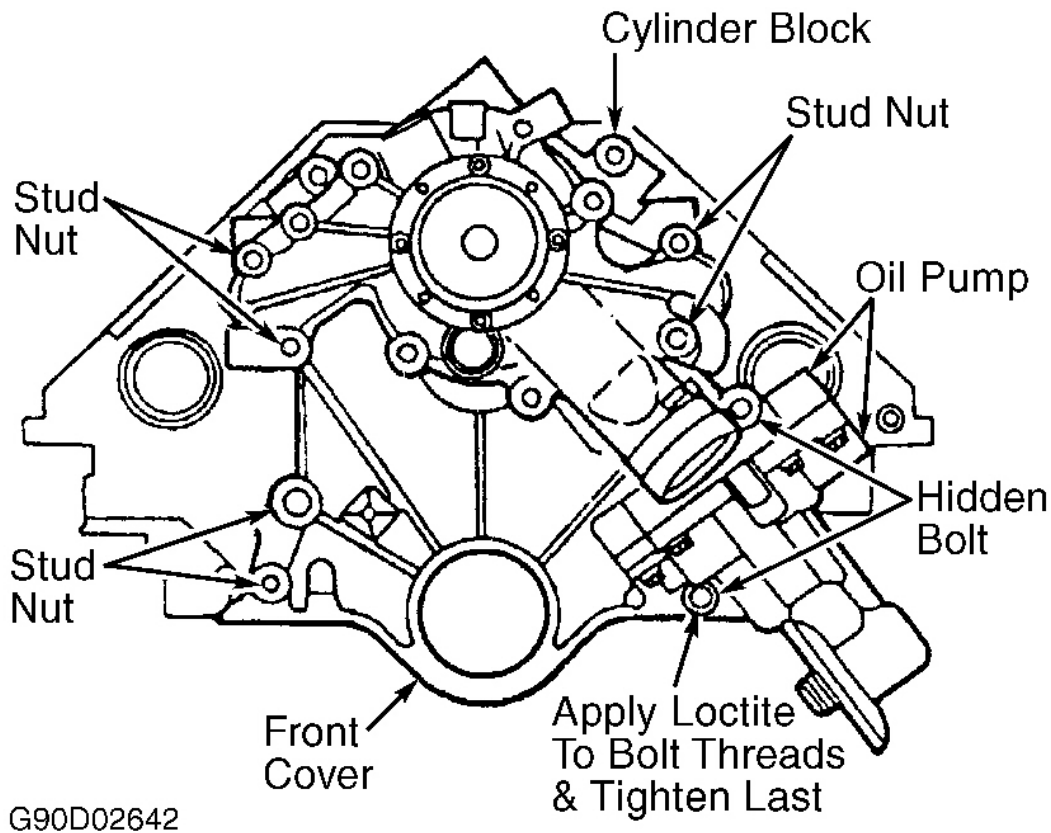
Identifying Front Cover Mounting Bolts & Studs
